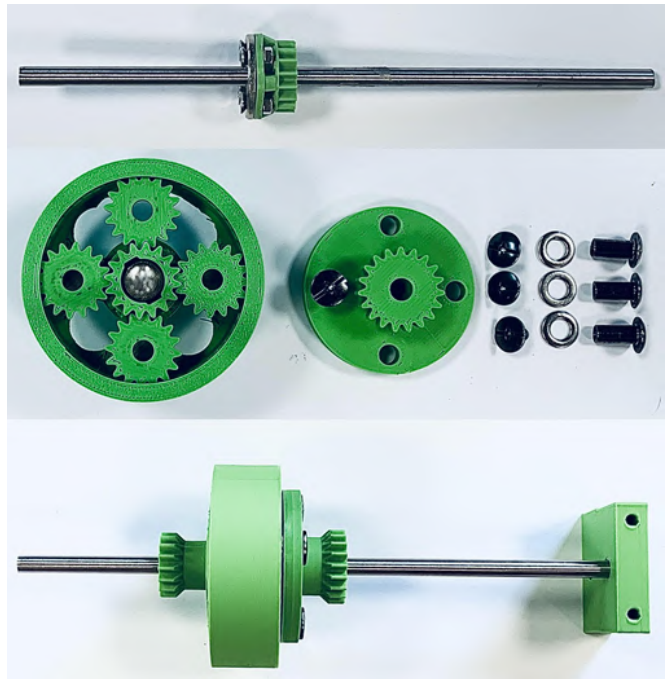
Views from a partial assembly of stage P1: sun gear fixture to motor shaft, planetary stage assembly including pins and washers, and single stage assembly on motor shaft.
